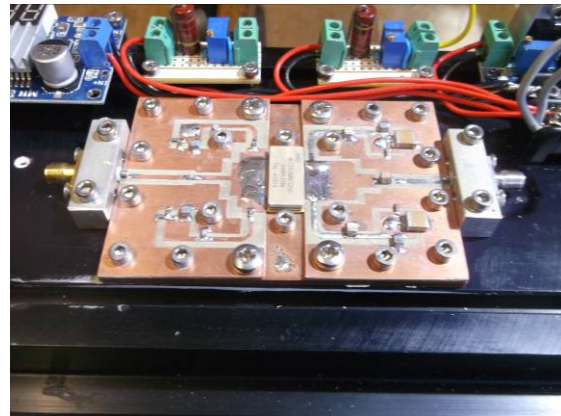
The pallet bolted down to the heatsink with 18 M3 screws and the connector blocks fitted.
